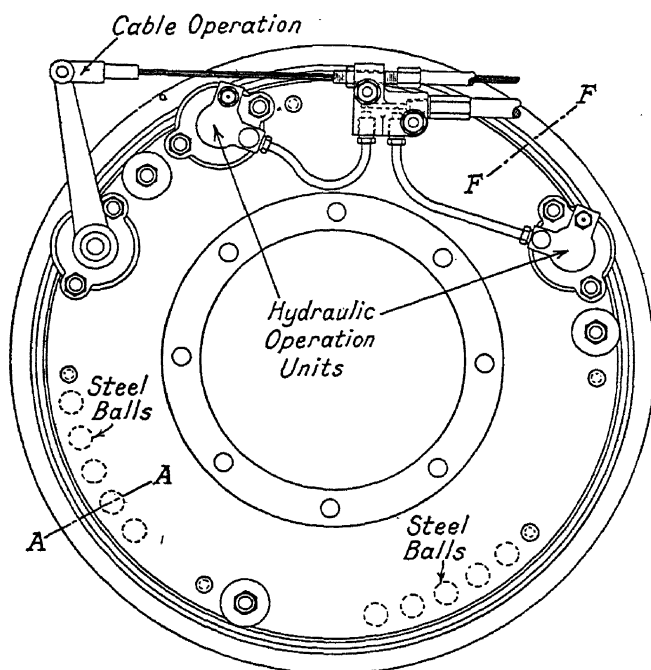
Girling Disc Brake, Showing Hydraulic Units, etc.
